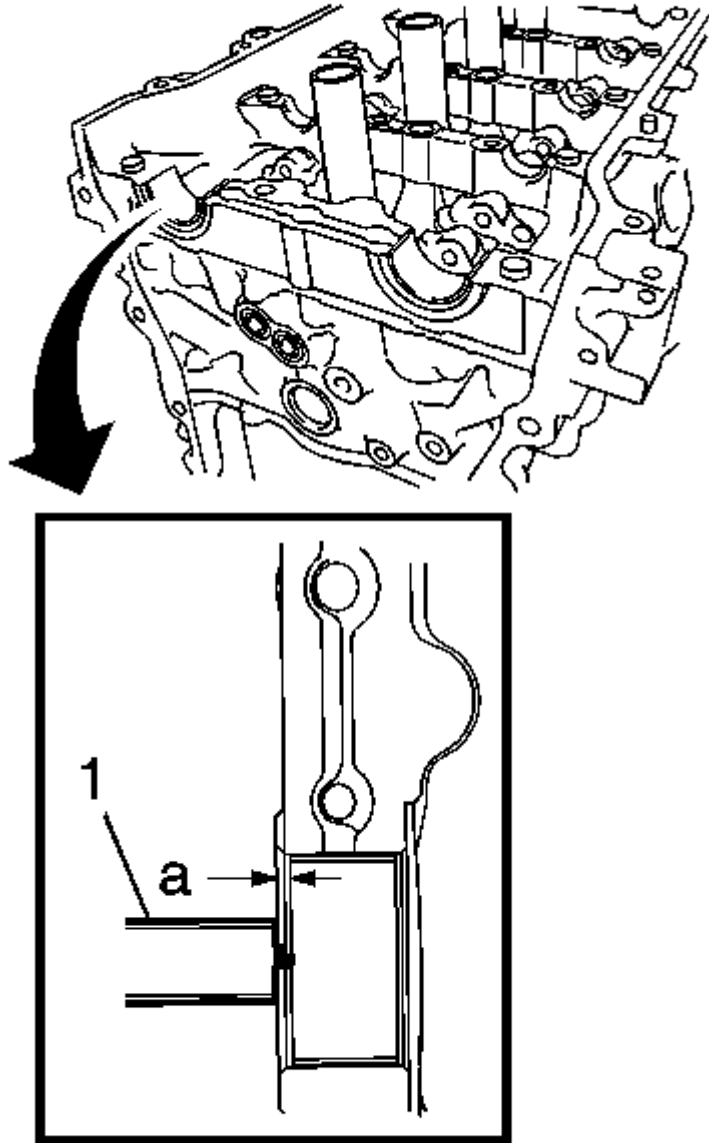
Measuring Distance Between Bearing Cap Edge & Camshaft Bearing Edge
